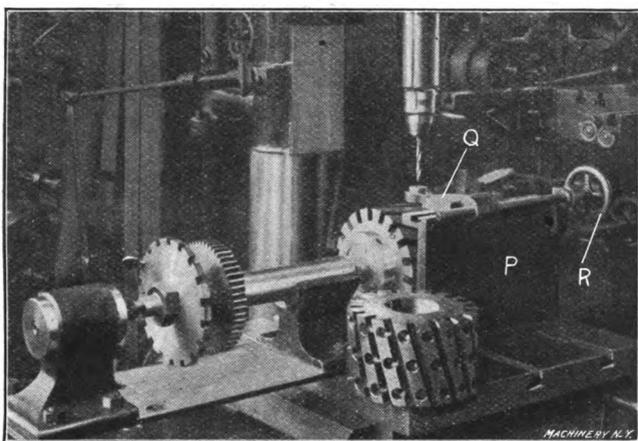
Jig for Drilling and Counterboring Holes in Cutter Body
